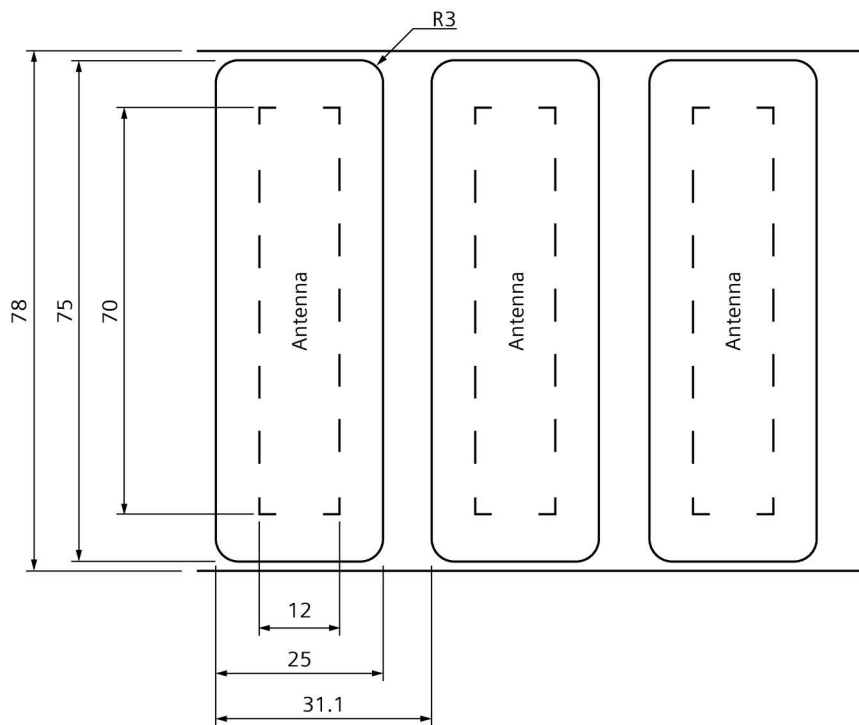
Dimension drawing SIMATIC RF630L Smartlabel (75 × 25 mm)
